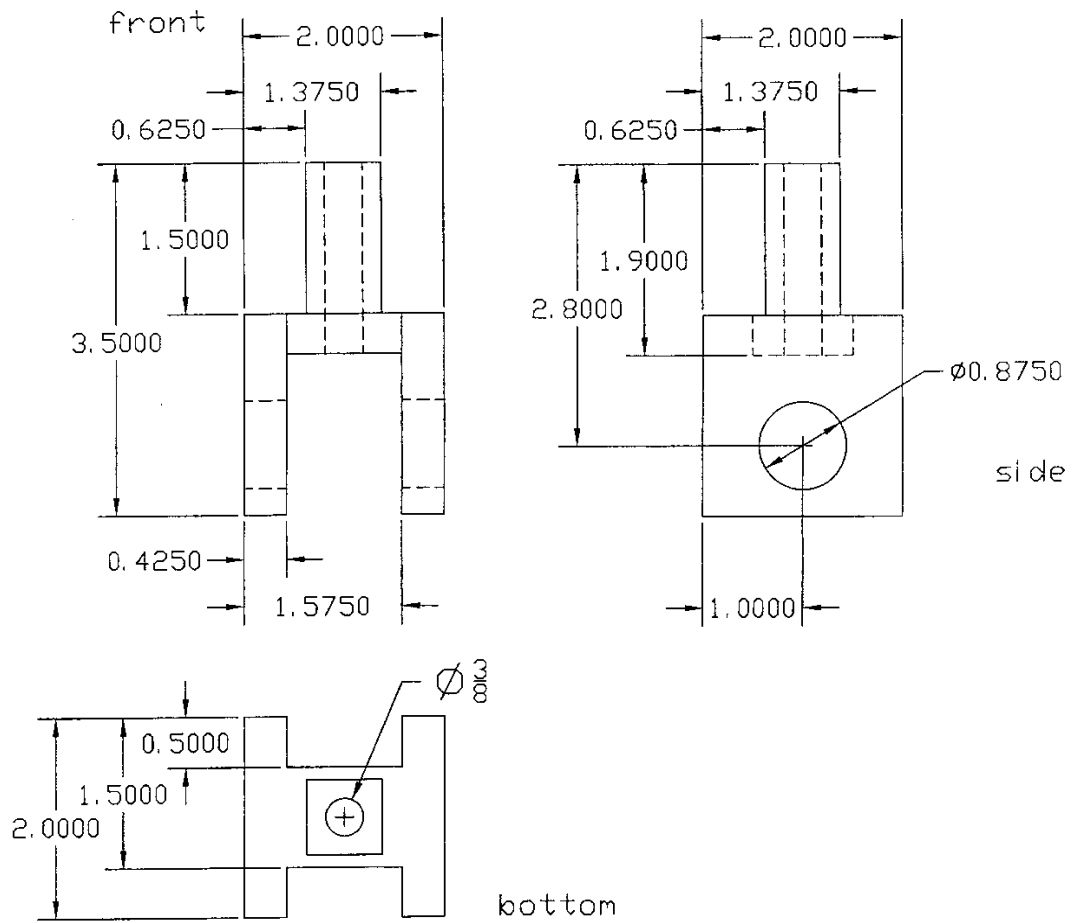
CAD details of the upper knees. All parts are machined from aluminum block.
